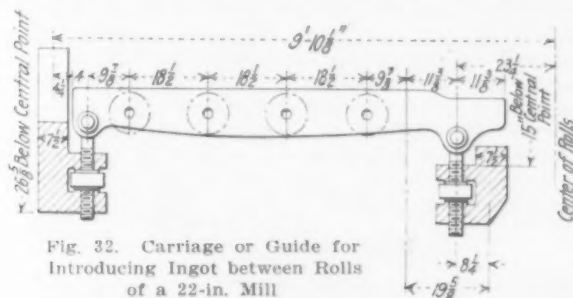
Carriage or Guide for Introducing Ingot between Rolls of a 22-in. Mill
